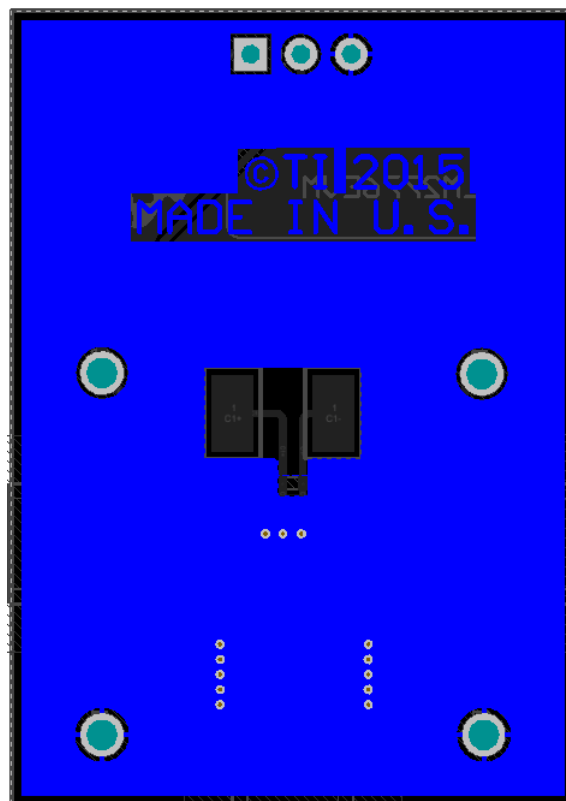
Bottom Assembly Layer (UNMIRRORED)
